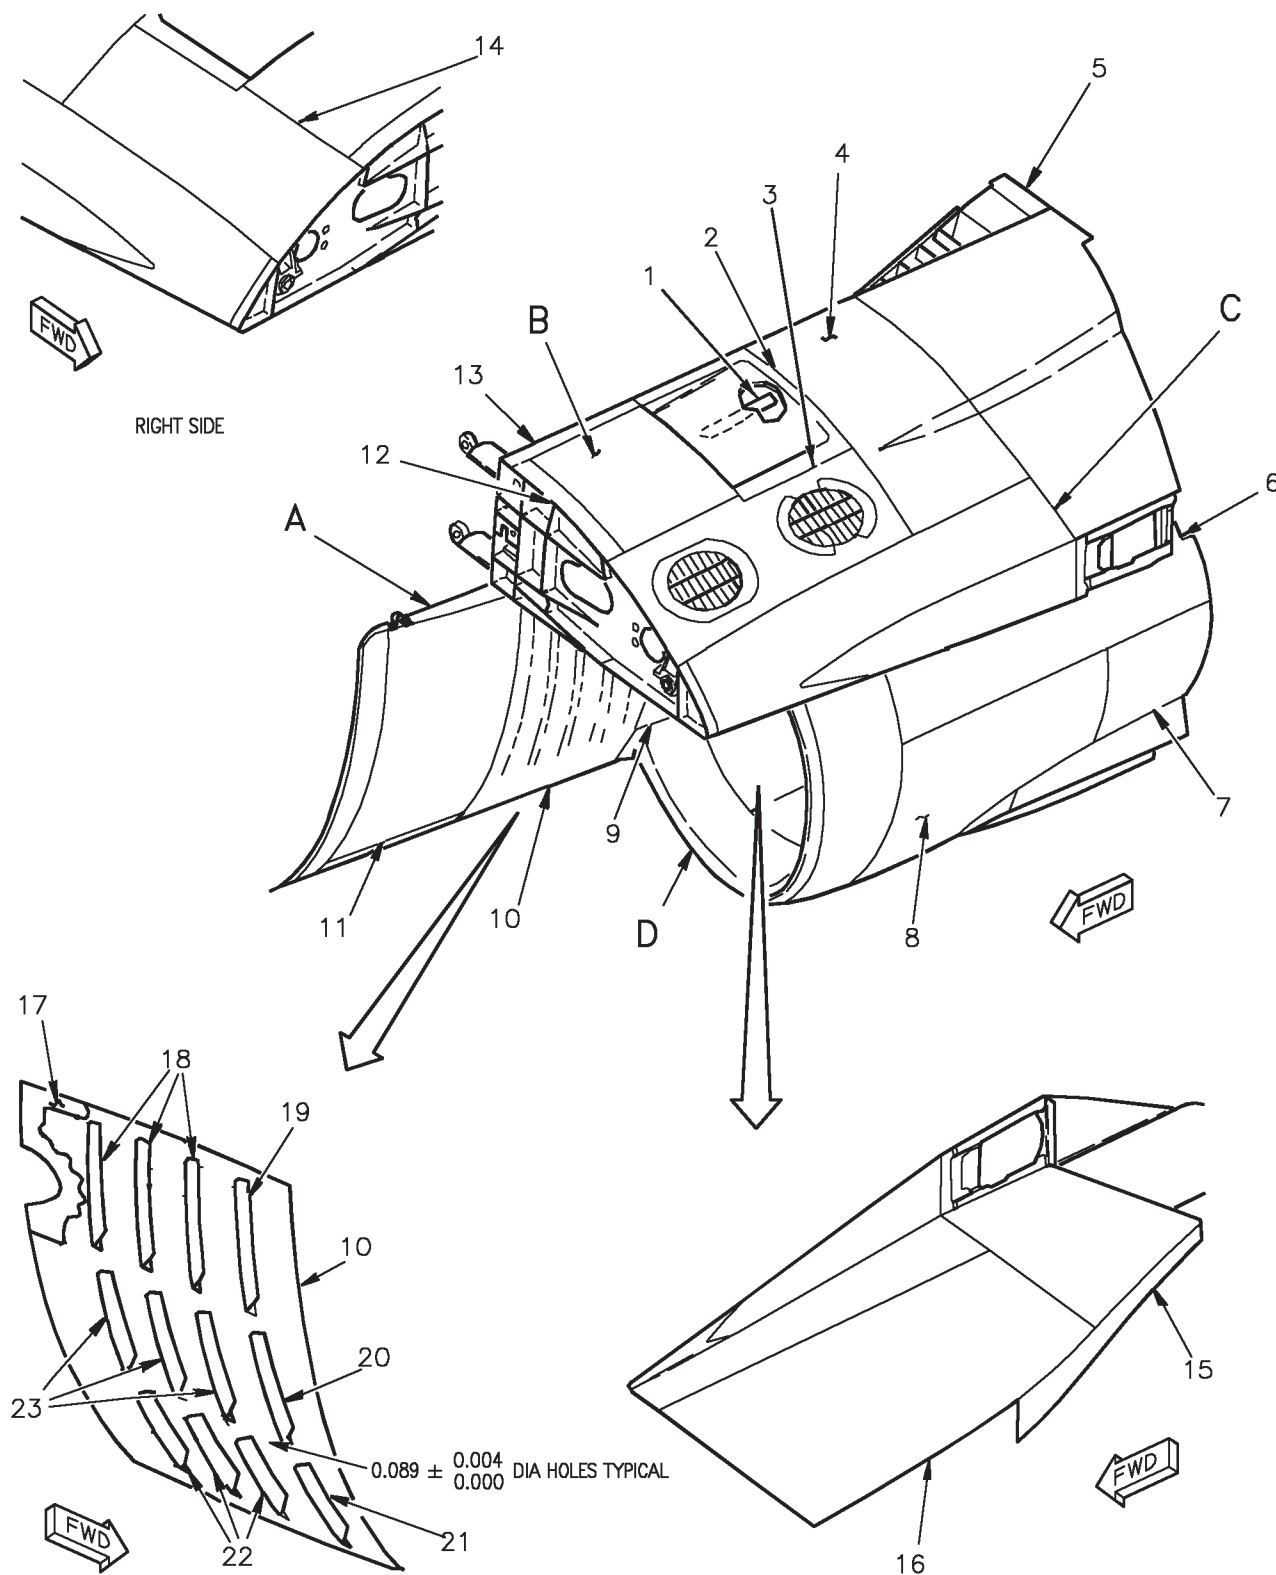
Air Inlet Skins, Doors and Covers (Sheet 1)
